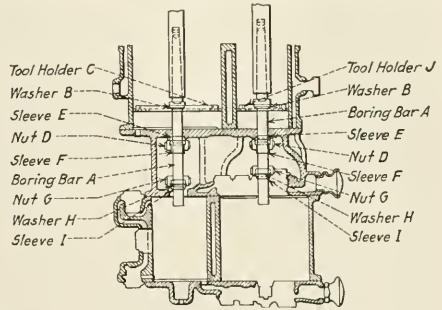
Cross Section Showing Boring Bars Assembled for Use
